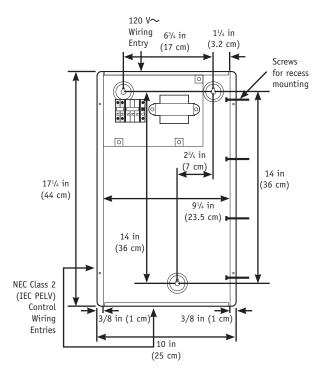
Dimensions and Mounting (HWI-LV17-120)
